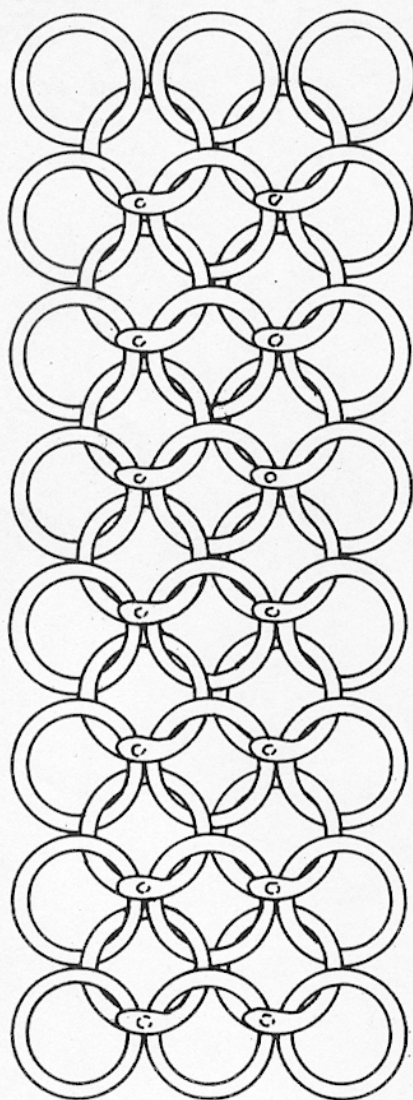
Schematic diagram of the 4 → 1 construction of the mail tunic, involving riveted and welded links.
